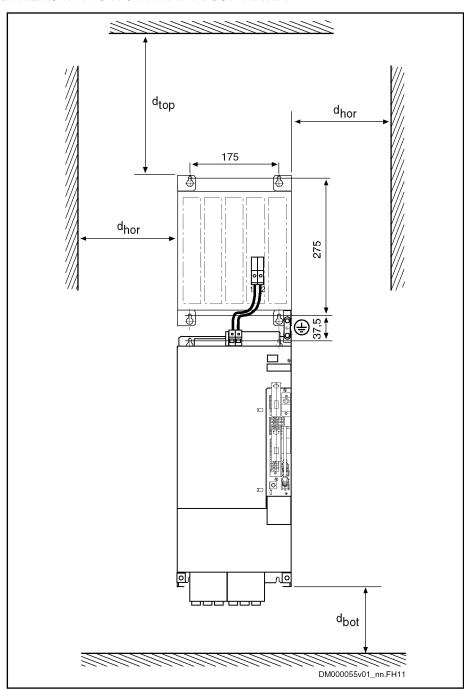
Dimensions Braking Resistor HLR01.1N-0300-N17R5-A-007-NNNN
